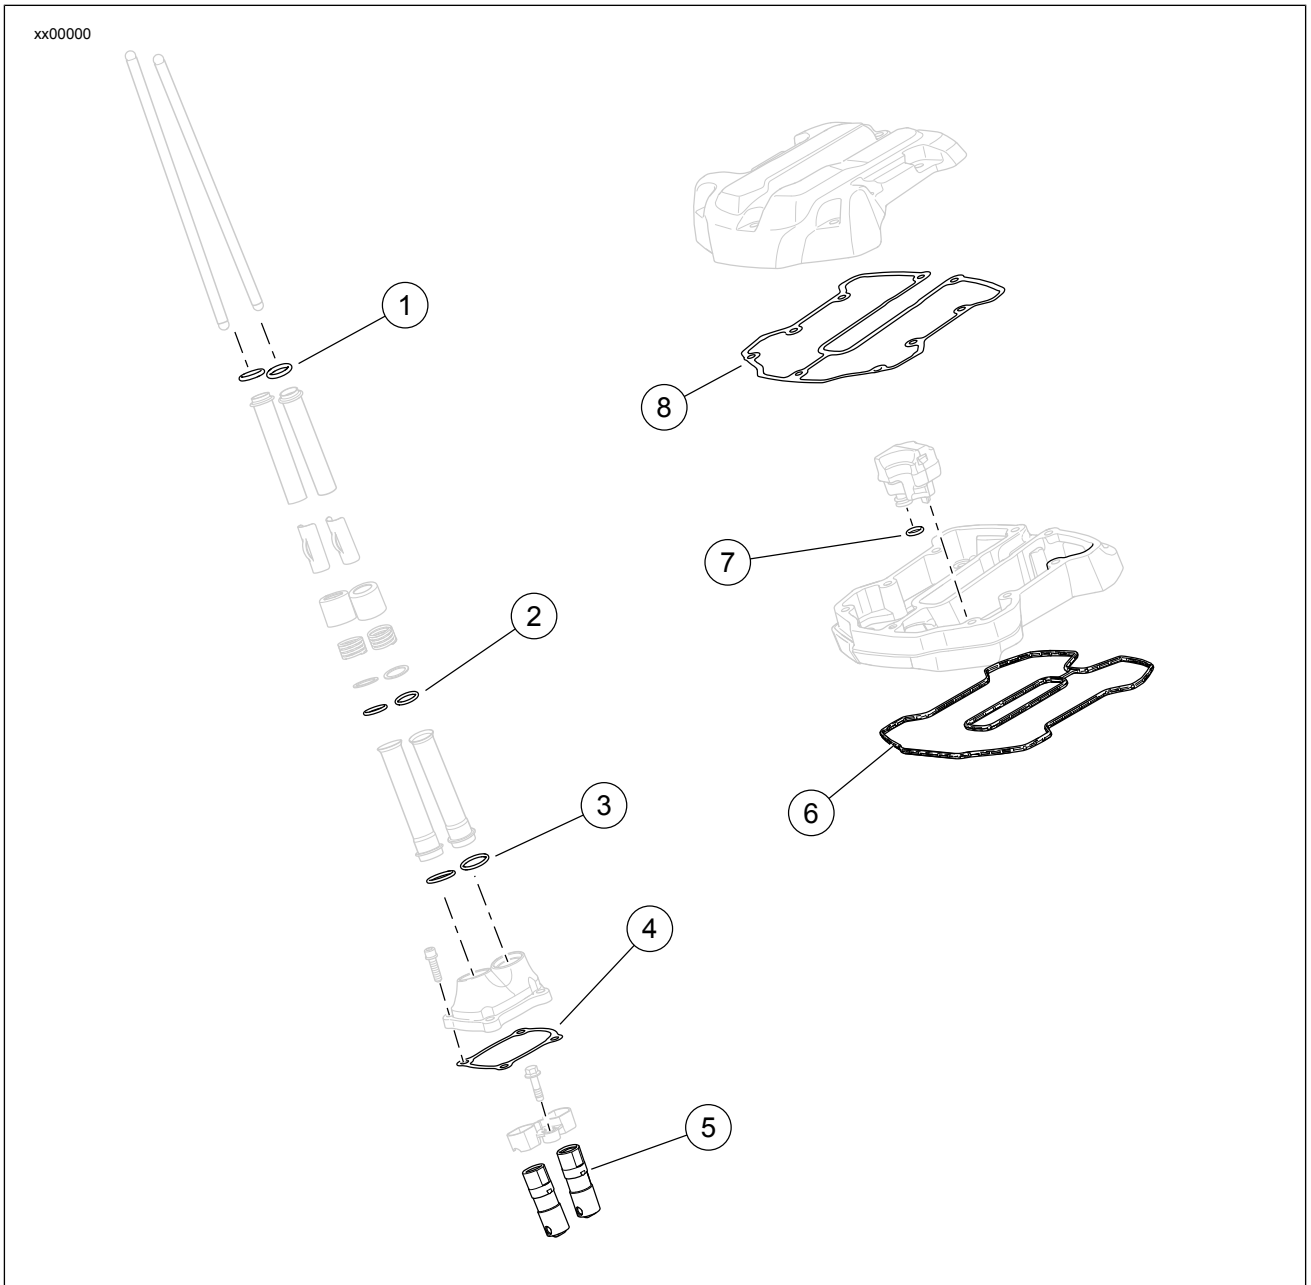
Service Parts, Valve Train: Screamin' Eagle Milwaukee-Eight Stage 3 Kit
